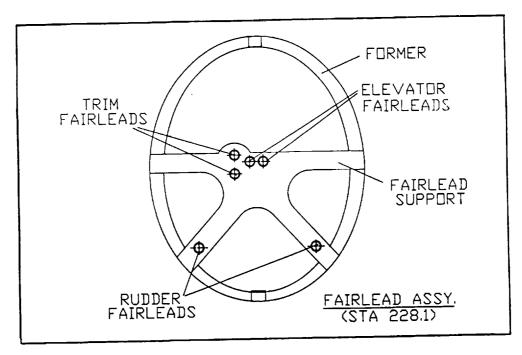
Front View of Fairlead Assembly (STA 228.1)
